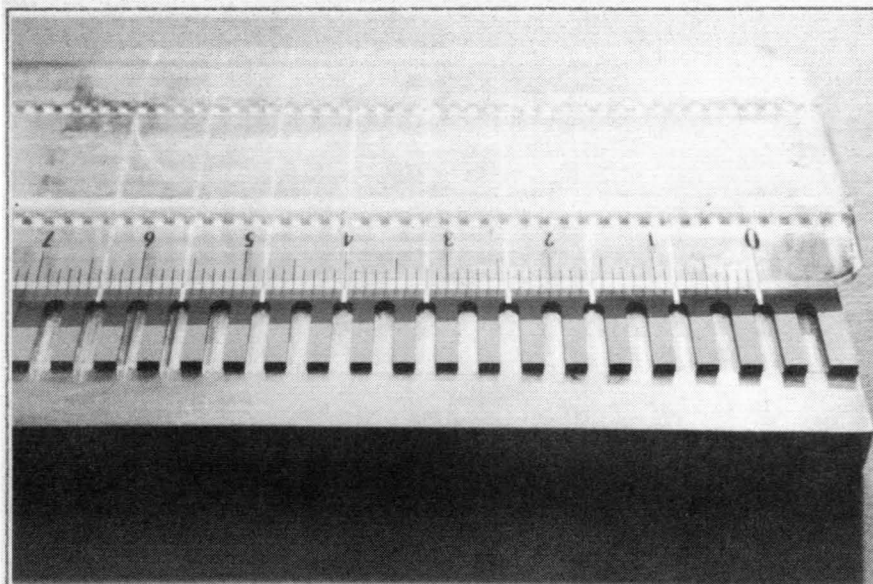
Sample LJS1 showing 1mm (.040in) deep docking ports milled into 316 plate
